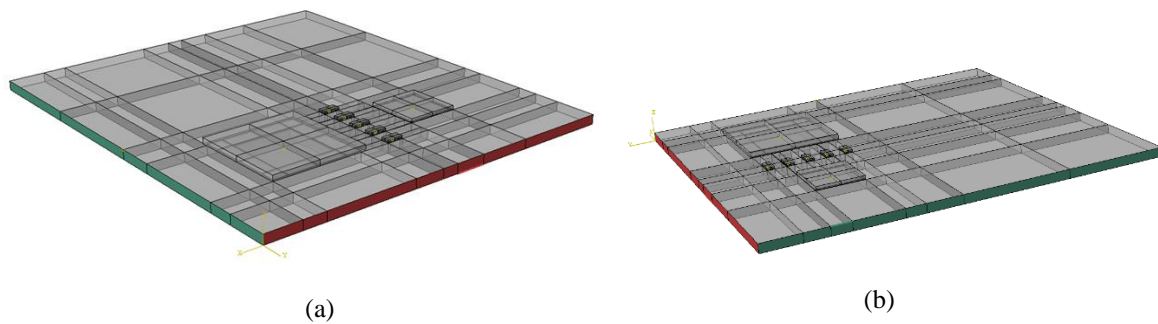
Two different board designs (a) BGA component in the center (b) QFN component in the center
